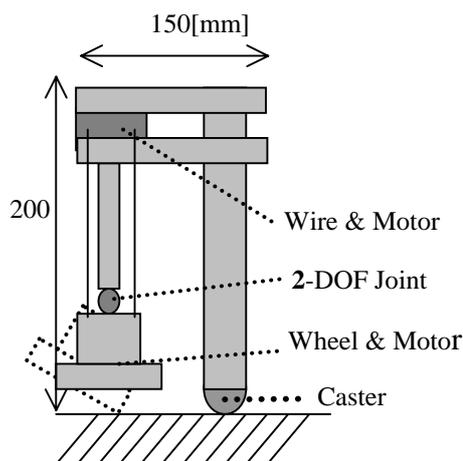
Schematic of the Horizontal Wheel Driving Mechanism (side view)
